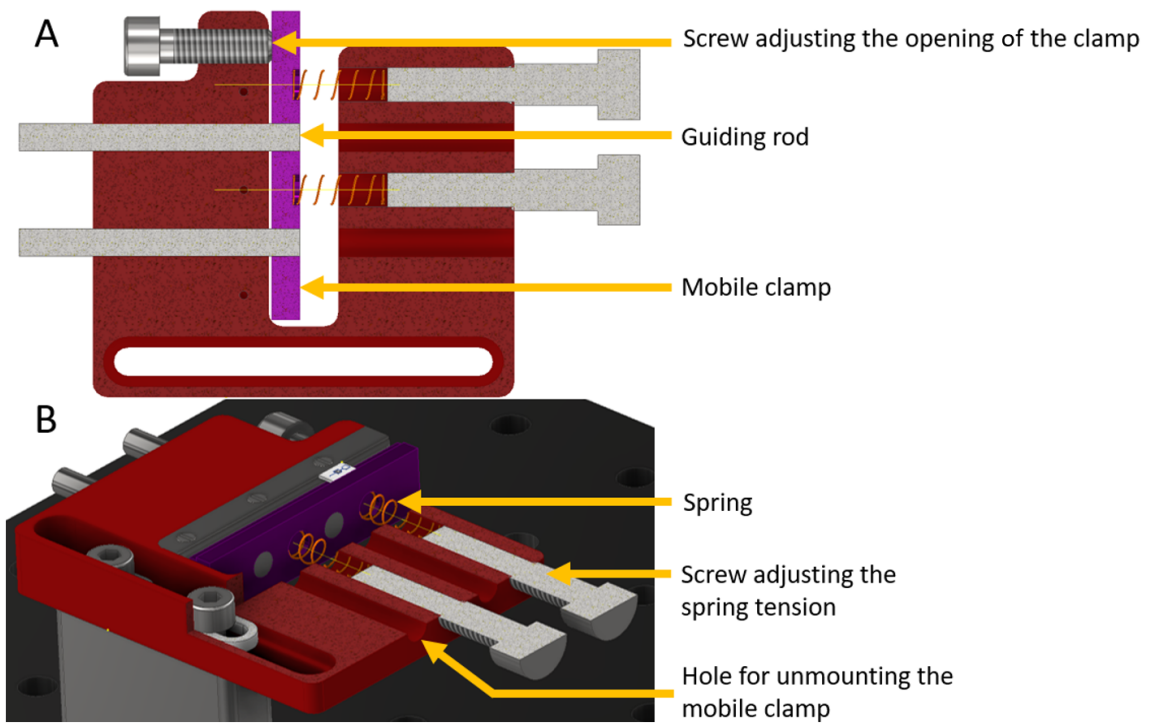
A: Half-section view of the chip holder. A screw is used to adjust the position of the guided clamp. A pair of guiding rods constrain the mobility of the clamp. B: 3/4-section view of the chip holder. A pair of screws is used to adjust the force that the springs apply on the guided clamp. A pair of holes drilled in the chip holder ease the unmounting of the guided clamp.
